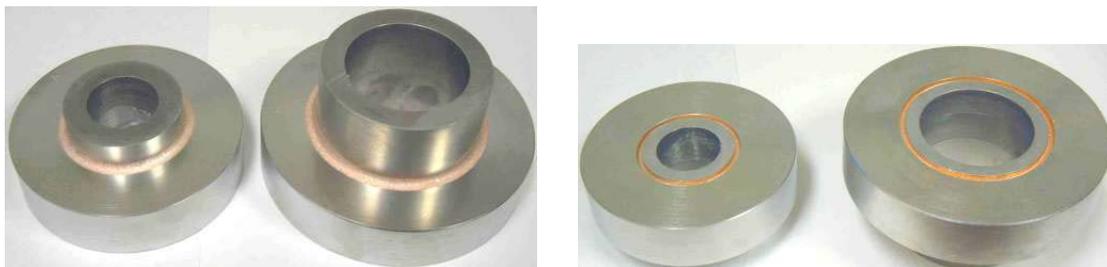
Braze assembly showing the underside of the joint (left) with copper fillet wetting both niobium and stainless steel and (right) the top side showing single groove for copper wire. The top surface with groove is later machined away.
